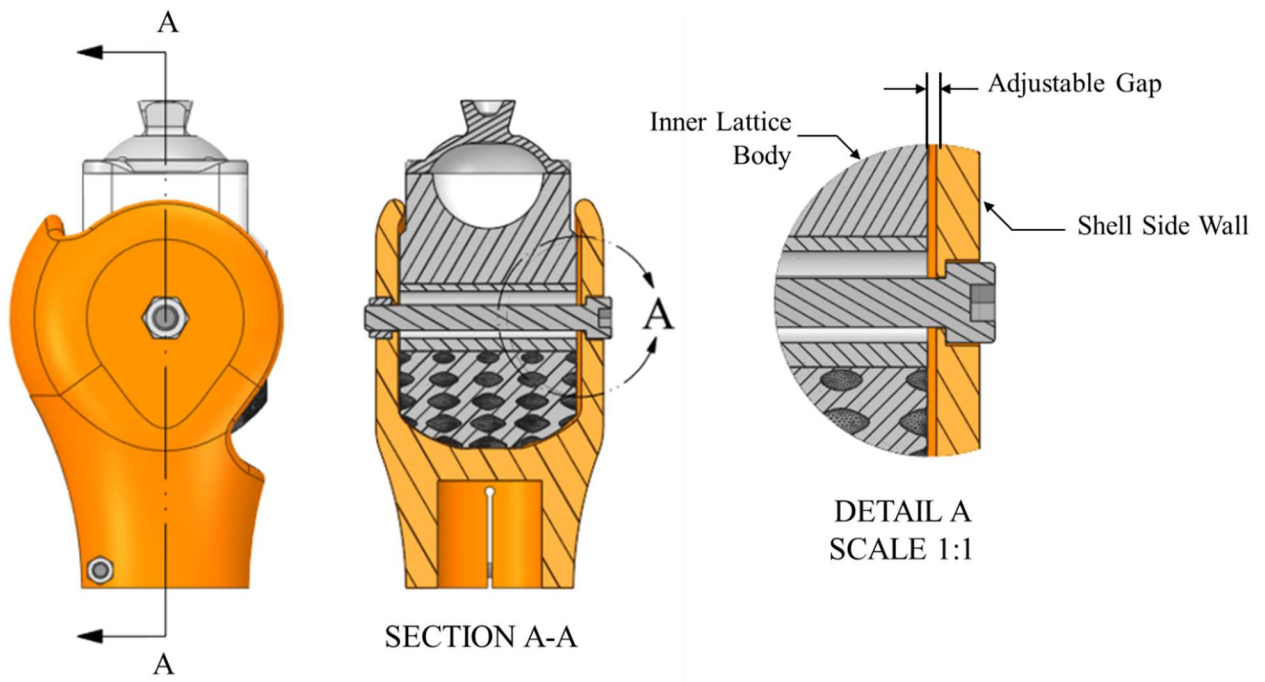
Detail view identifying adjustable gap between shell and lattice body.
